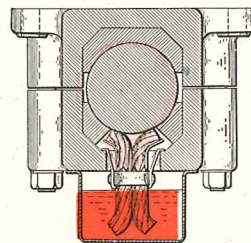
Bottom-feed wick oiled bearing for pressure on upper half of bearing.
